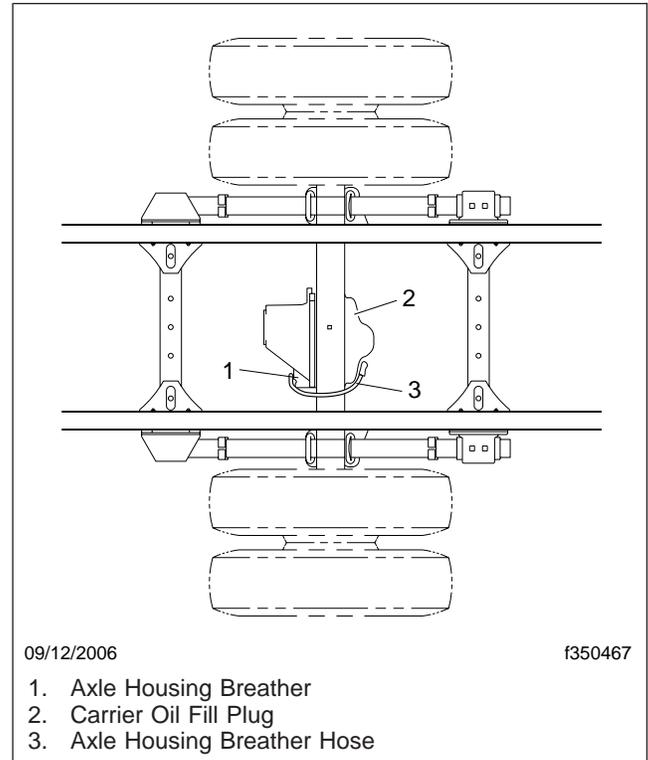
, Freightliner Fill Hole Plug and Axle Housing Breather Locations
